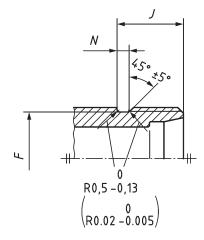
Configuration, dimensions and tolerances of fitting end design, style B (same as style G except as shown)
